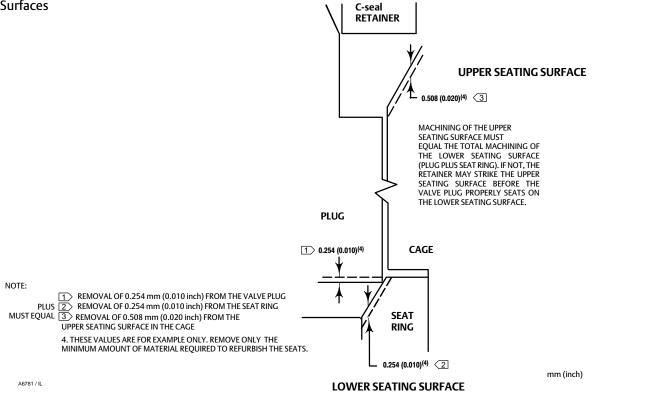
Example of Machining the Lower (Valve Plug to Seat Ring) and Upper (C-seal Plug Seal to Cage) Seating Surfaces
